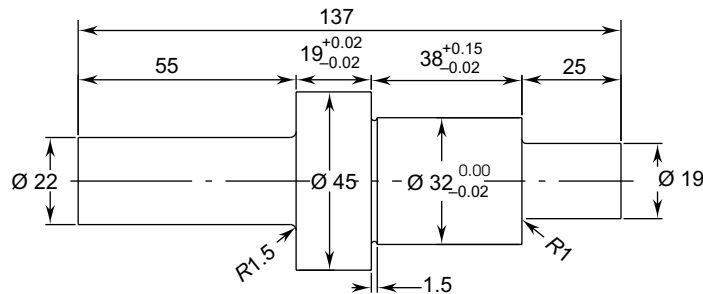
Typical process pictures for machining a pin from a cylindrical bar on a lathe involving only external features
